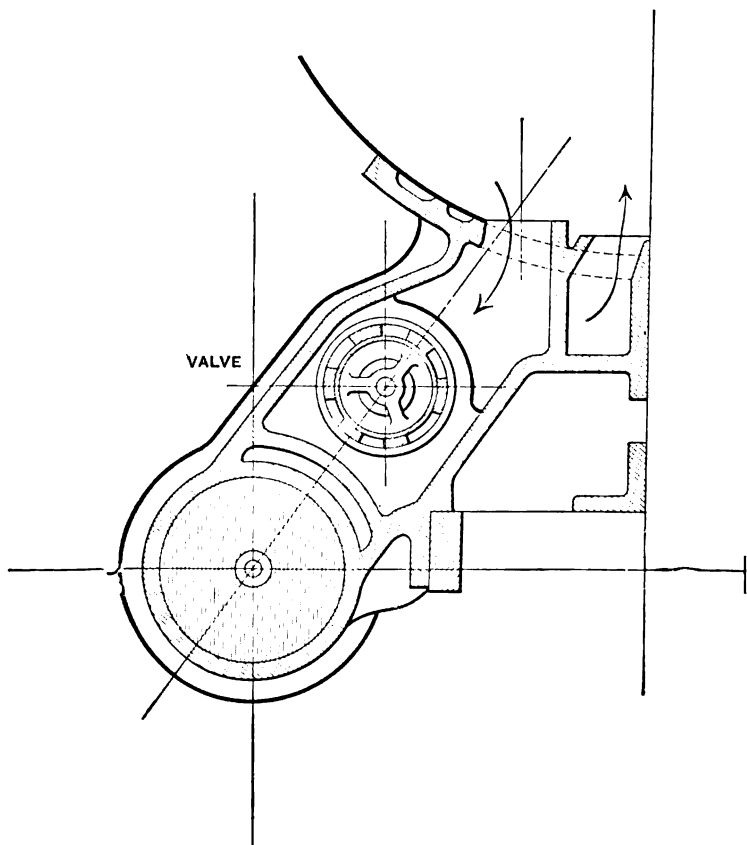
SECTION THROUGH SADDLE-VALVE AND CYLINDER,
